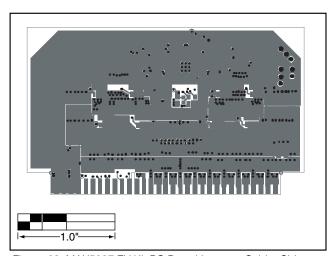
MAX5037 EV Kit PC Board Layout—Solder Side
